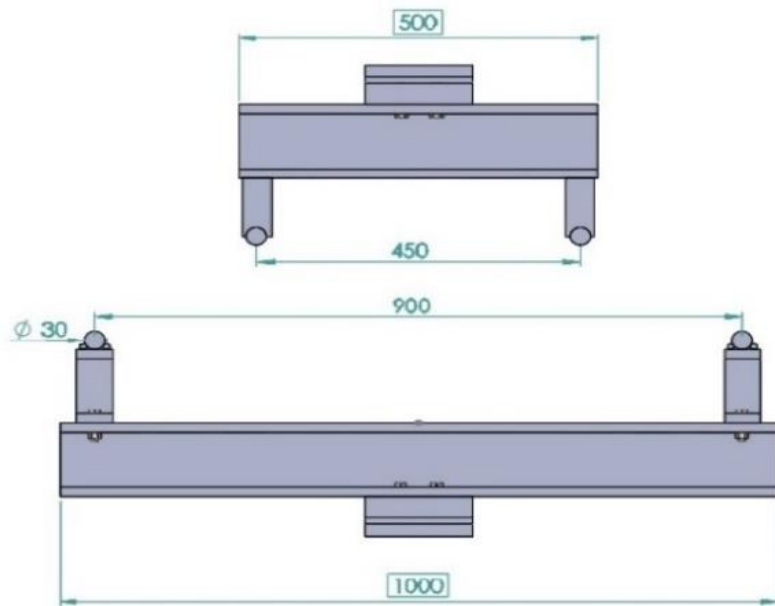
Image – Dimensions (in mm) of the four-point bending device
